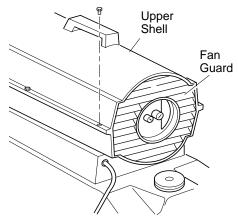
Upper Shell Removal 40,000 & 60,000 Btu/Hr Models
